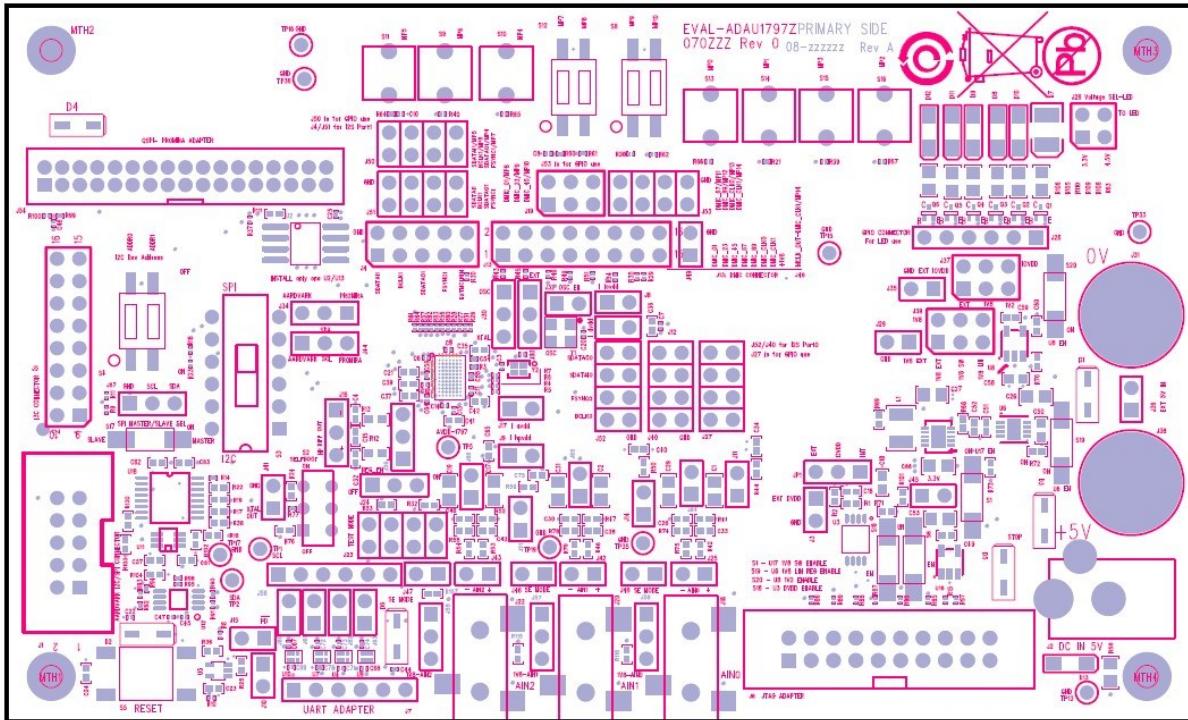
EVAL-ADAU1797Z Layout: Top Assembly
